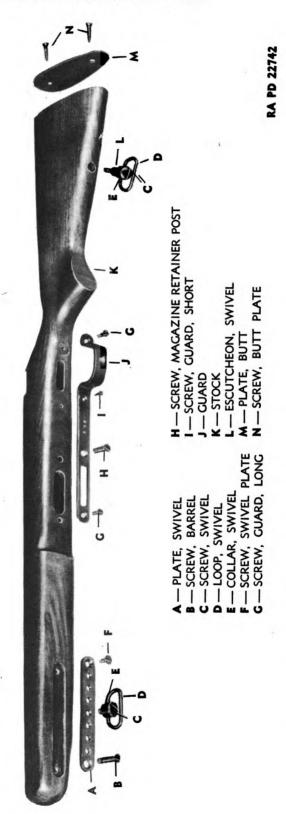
Stock Group of Stevens Rifle, Cal. .22, Model 416-2 - Exploded View
